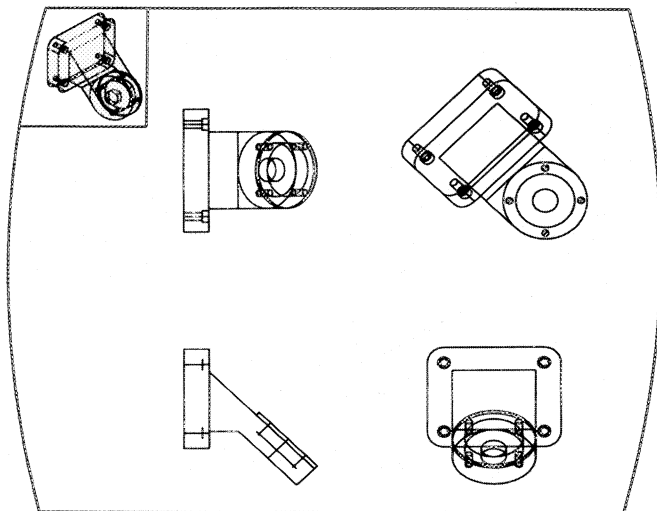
Auxiliary View Projection Using 3D CAD
